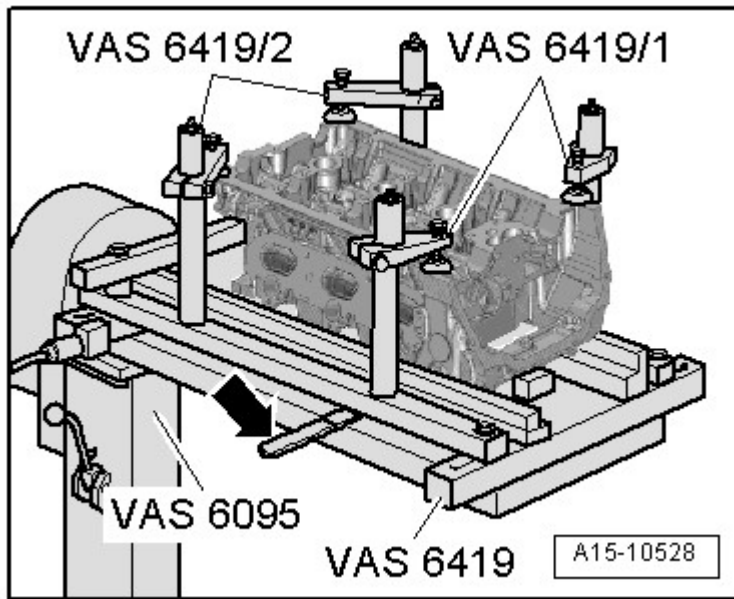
Tensioning Cylinder Head On Tensioning Element VAS 6419
